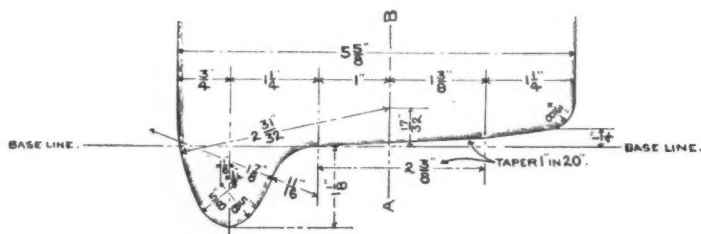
Recommended M. C. B. Standard Wheel Tread and Flange.
